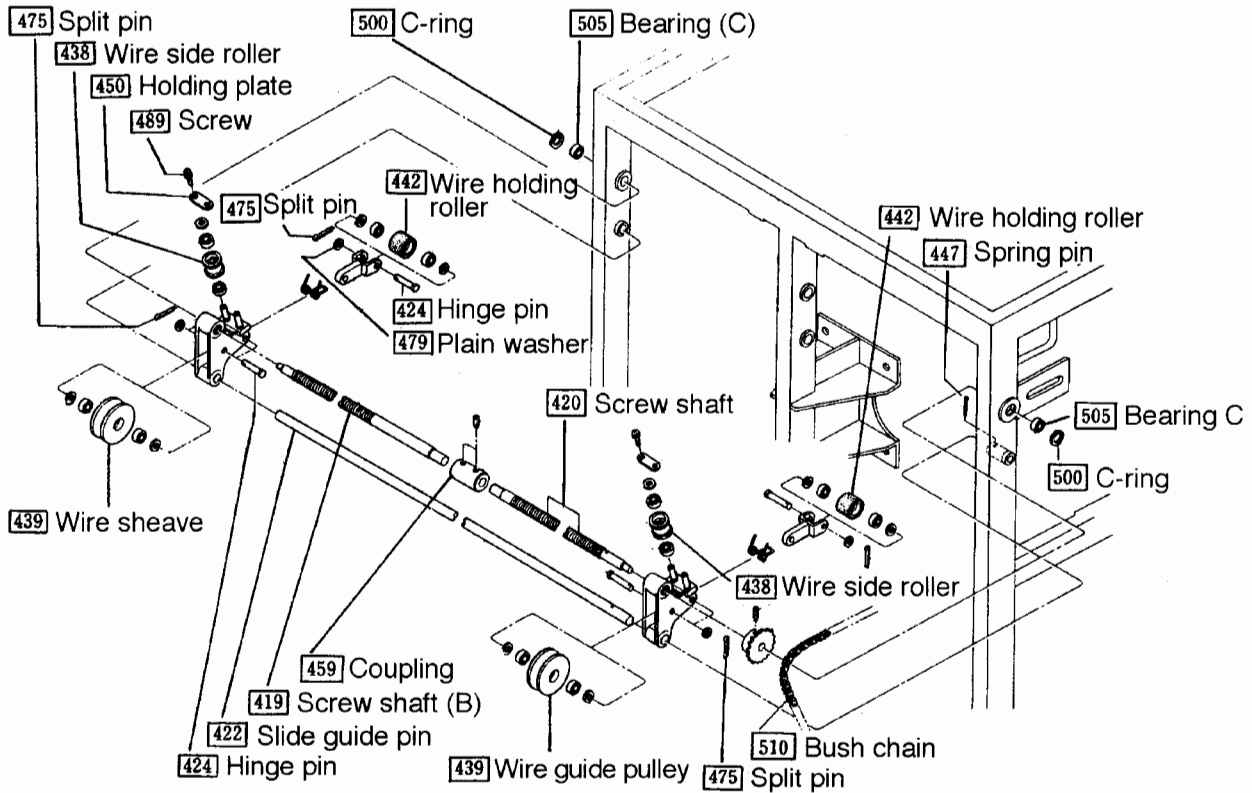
How to replace wire side roller, wire holding roller, screw shaft (A) screw shaft (B), wire sheave and guide pin.
